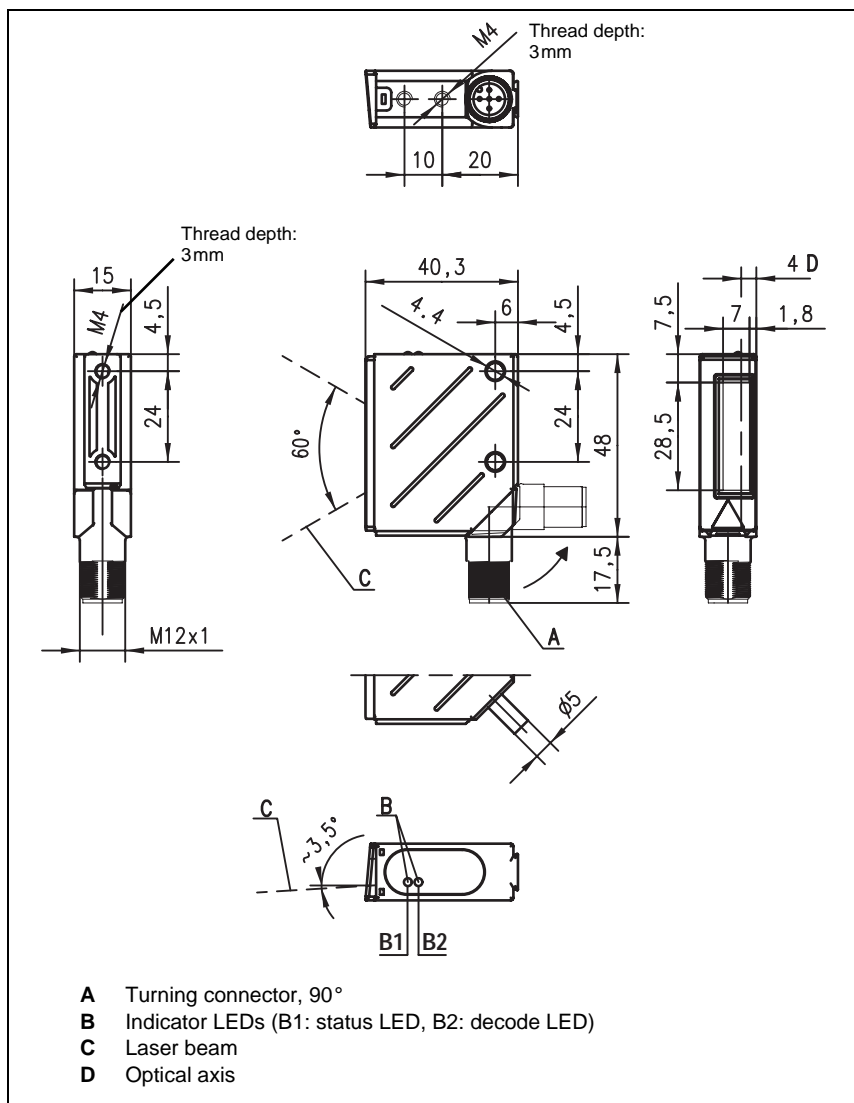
Dimensioned drawing BCL 8 S M ...2 with front beam exit
